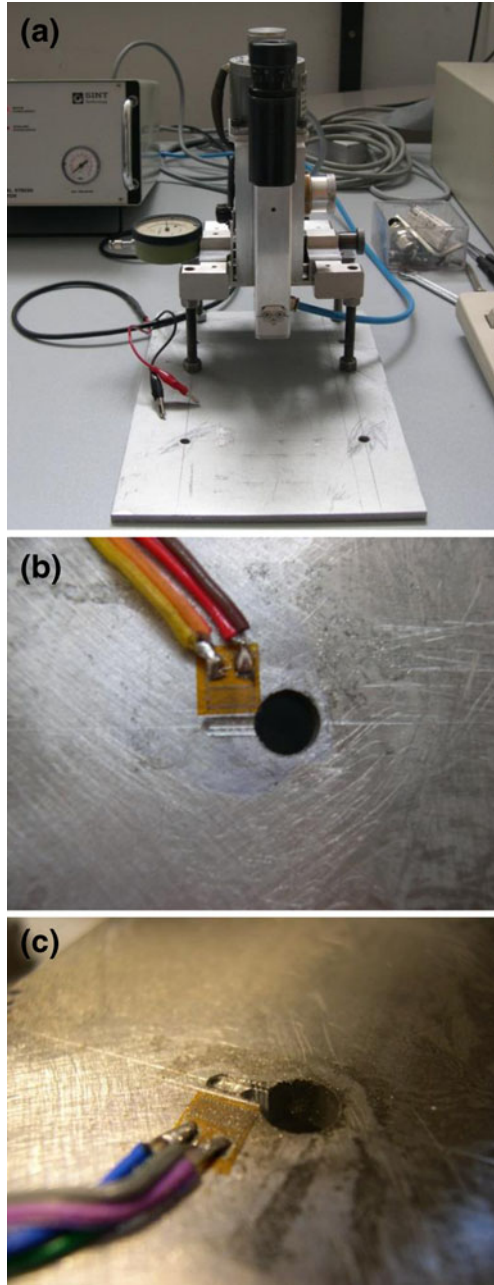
(a) special three-axis machine used to mill the grooves, (b) image of groove 1 completed and (c) image of groove 3 with 3 feeds executed
